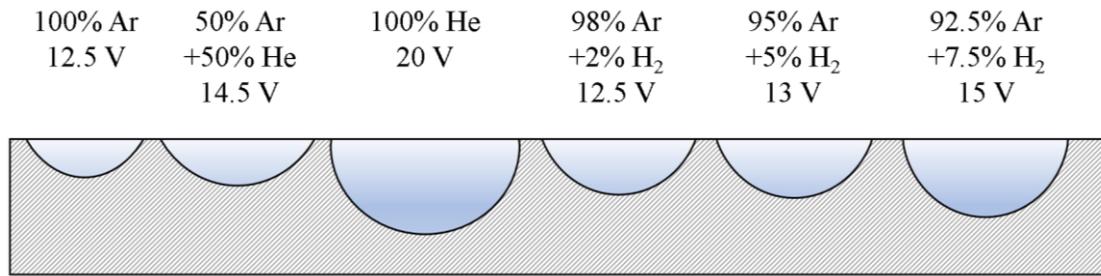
The penetration and arc voltage in stainless steel welding. Steel: 304 Sheet: 5 mm, Welding current amperes: 130 A, Arc Length: 4 mm, Welding Speed: 15 cm/min (Lukkari, 2006).
